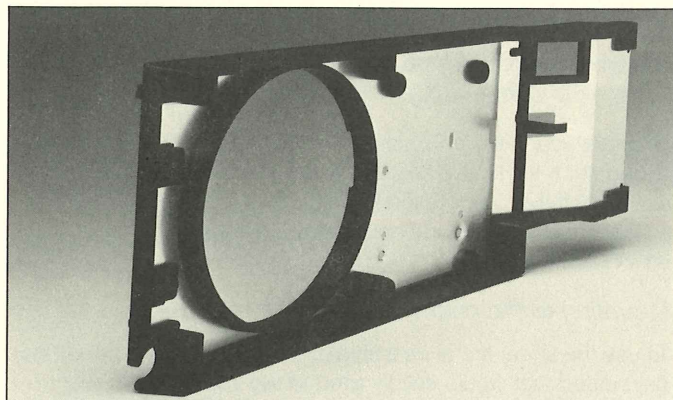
The spotmolded chassis showing the aluminum substrate with molded in details such as grommets, anode-lead clip, circuit board mounting details, fan shroud, casting-ground details, and structural flanges.
